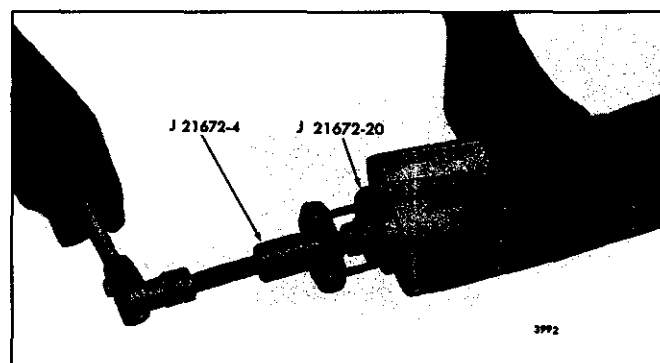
Removing Oil Seal Sleeve and Roller Bearing Inner Race from Rotor Shaft
